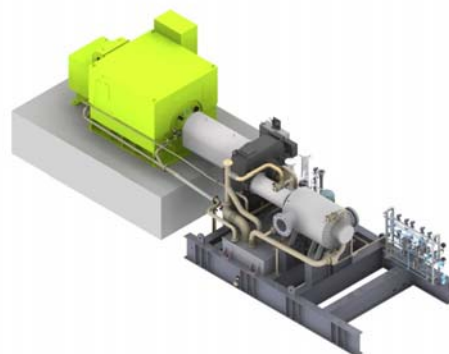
Typical Motor Driven Compressor Train including Intermediate Gear.
